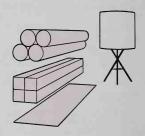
Rods, bars and sheets of metal are used to make up a larger shape or mass.
